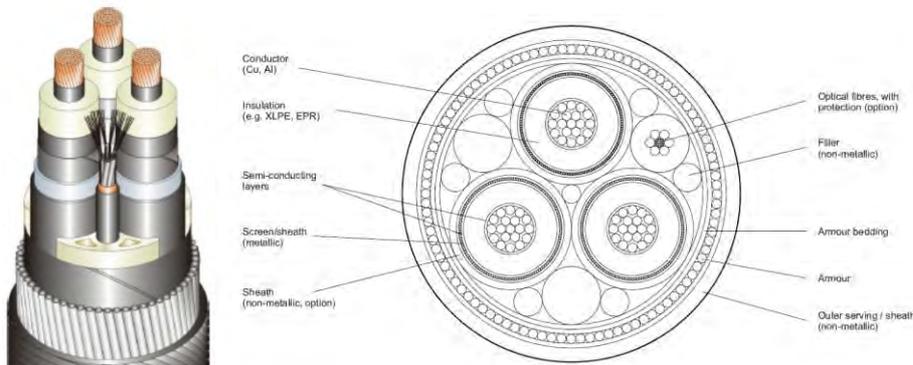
Typical 3-core HVAC 220 kV sea export cable cross section (ref. DNVGL-RP-0360)
